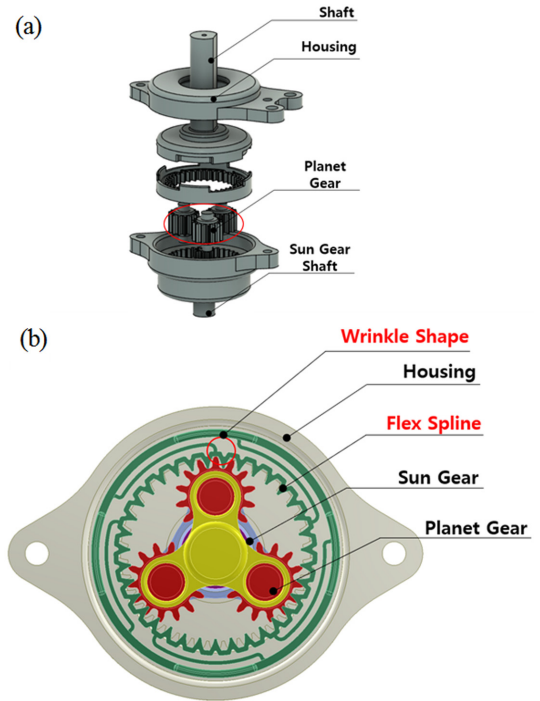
Harmonic Drive (a) Assembly (b) Cross-Section.
